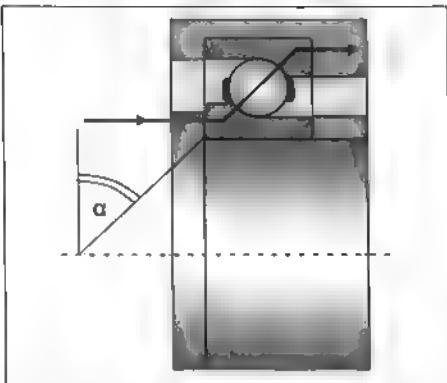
The way axial loads are carried by an angular-contact ball bearing.
